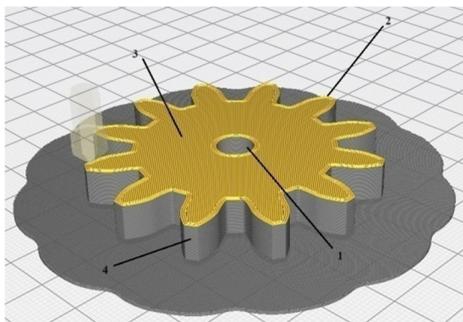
Sliced gear model: 1-specimen; 2-shells; 3-infill pattern; 4-overlapping layers.
